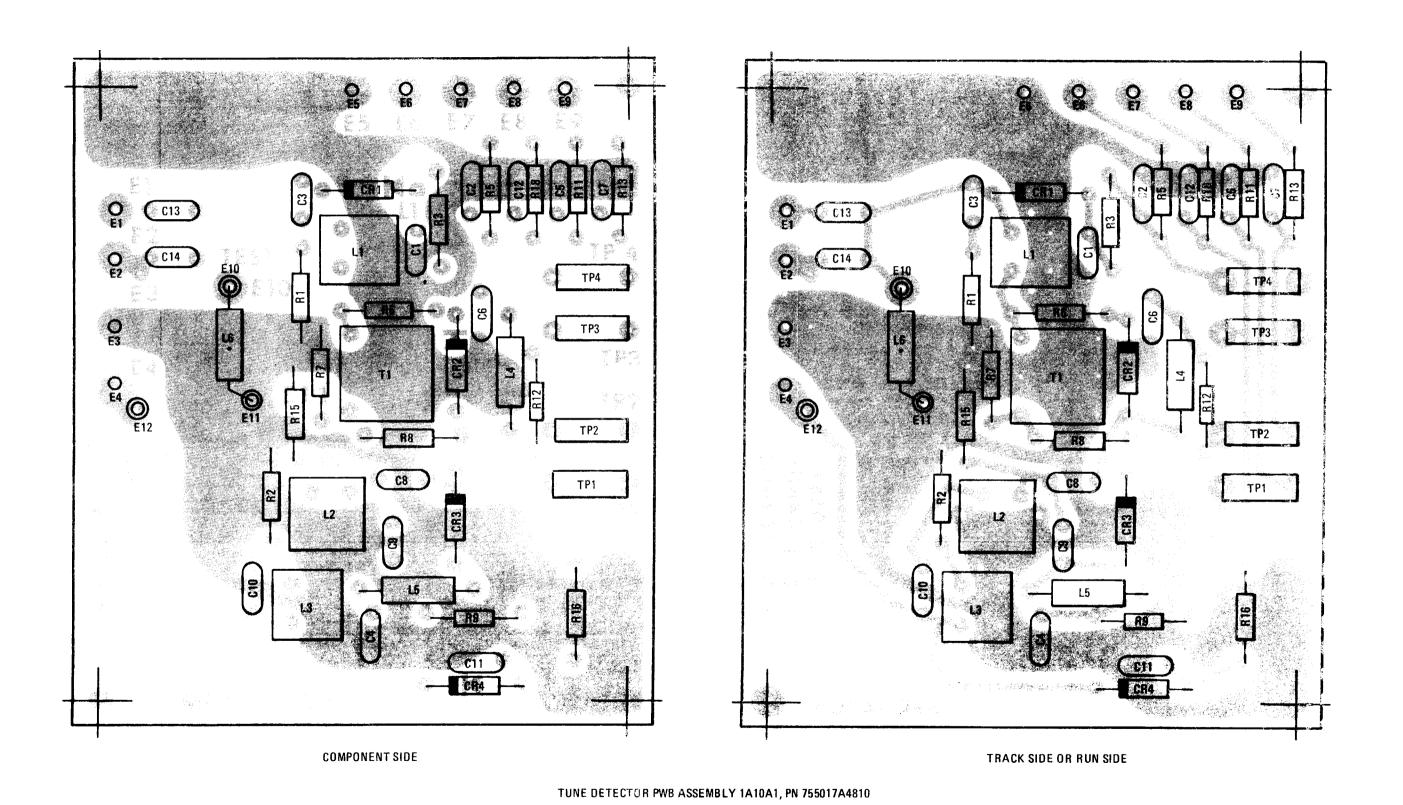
Tune Detector Module Assembly 1A10, PN 755017A4800 (Sheet 2 of 2)
